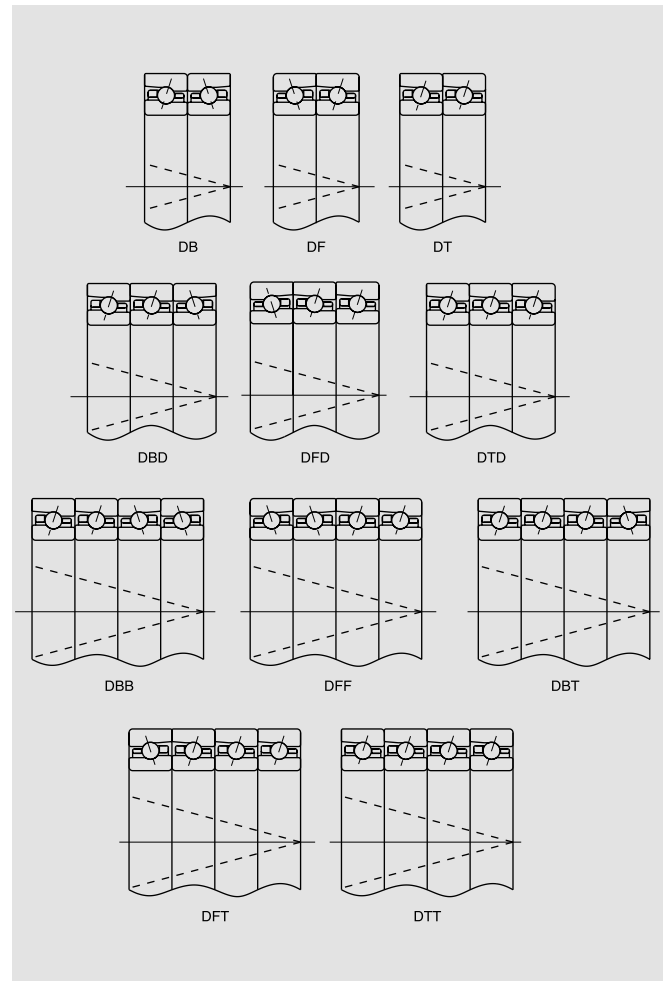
Combinations of Angular Contact Ball Bearings
